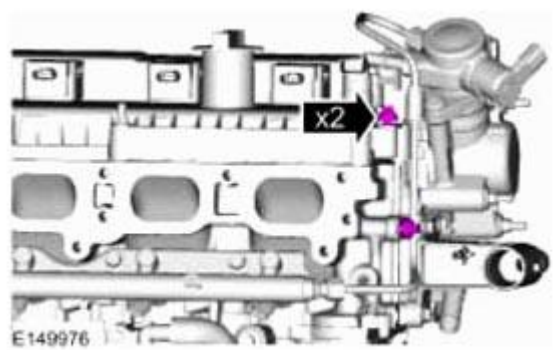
Locating High Pressure Fuel Tube Bracket Bolts
